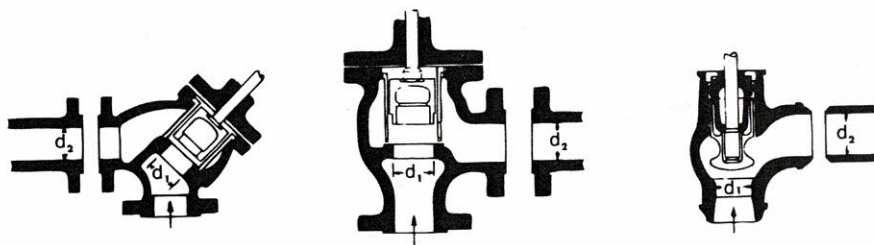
Angled body stop check valves: cage guided with actuator mounted at 45° (left), cage guided with actuator mounted at 90° (center), and angled with disc fully removed from the flow path (right). (courtesy of Crane Valve Co.)
